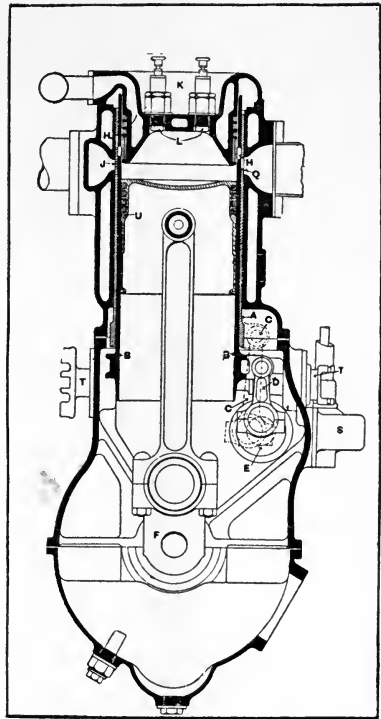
End Sectional View of Knight Sliding Sleeve Type Motor, Showing Sleeves which Take Place of the Poppet Valves of Conventional Motors. A—Outer Valve Shell. B—Inner Valve Shell. C—Operating Lever for A. D—Operating Lever for B. E—Lay Shaft. F—Crank Shaft. G—Helical Gears. H—Valve Opening. K—Cylinder Head. L—Sparking Plug Holes. O—Cross-Shaft Driving Pump and Magneto. U—Piston.
